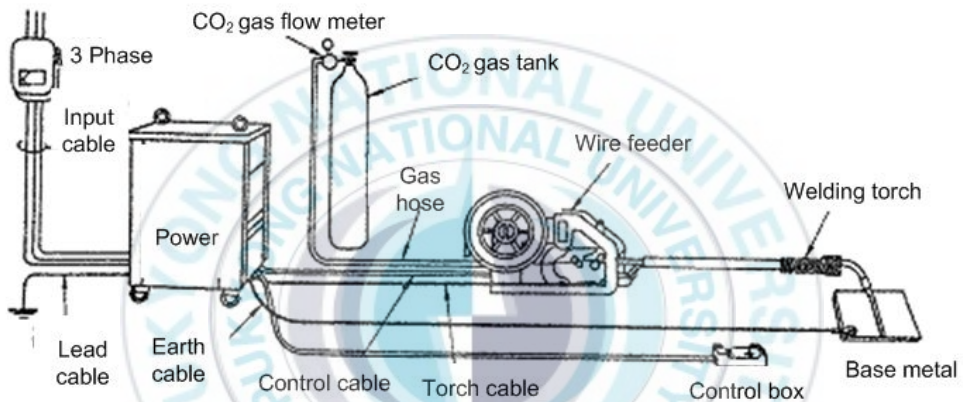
Schematic of CO₂ welding equipment¹⁾
